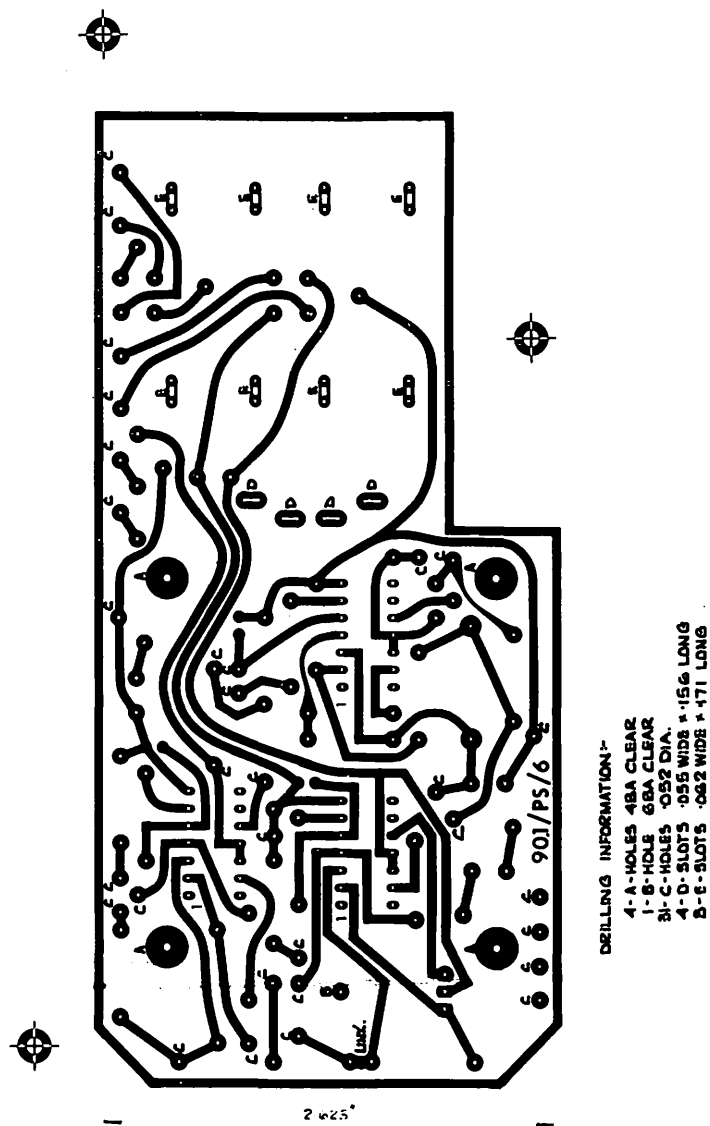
Power Supply Printed Circuit Board — Underside.
